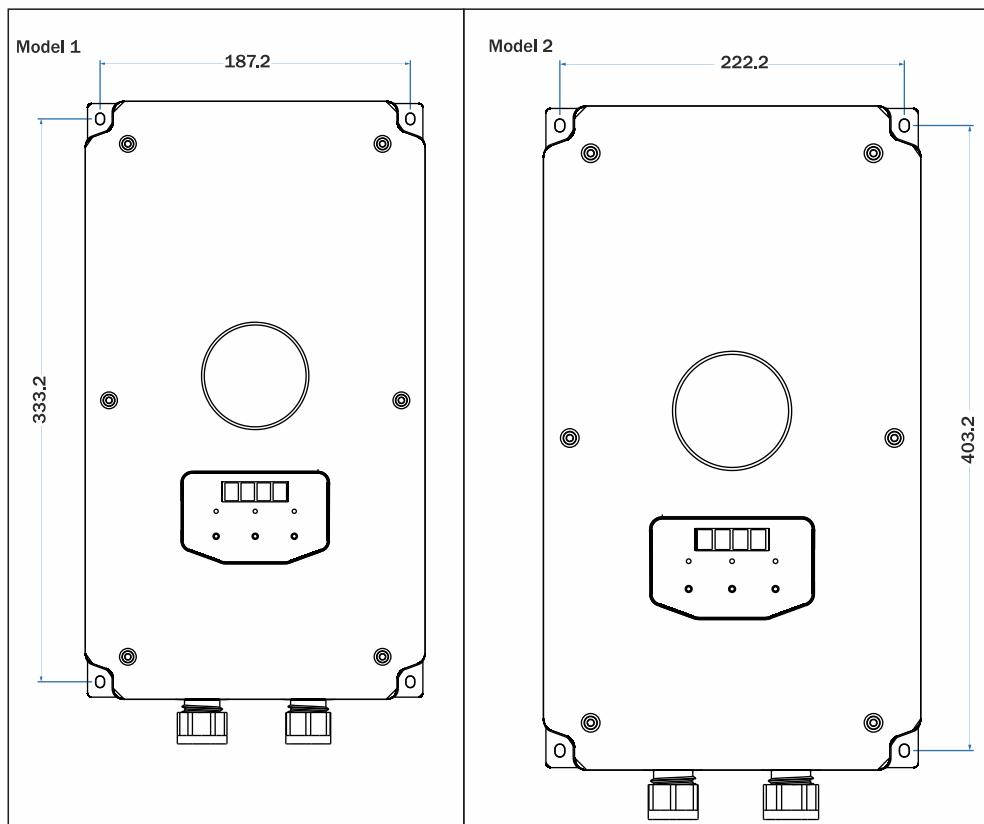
Mounting dimension for Model 1 & Model 2.
